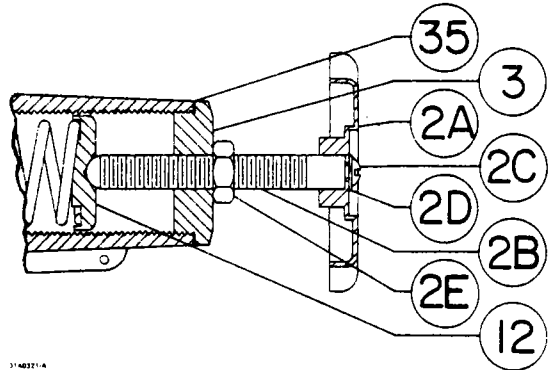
Types Y600-12, -13 or -14 Regulator Handwheel Assembly
